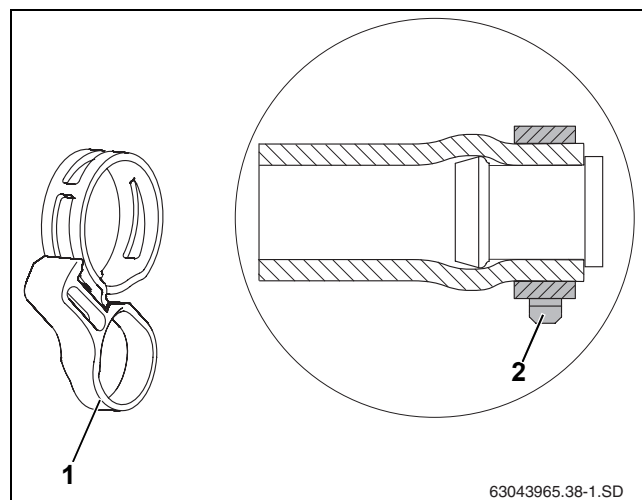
Hose clip with locking ring fixed to the pre-assembled dummy plug
